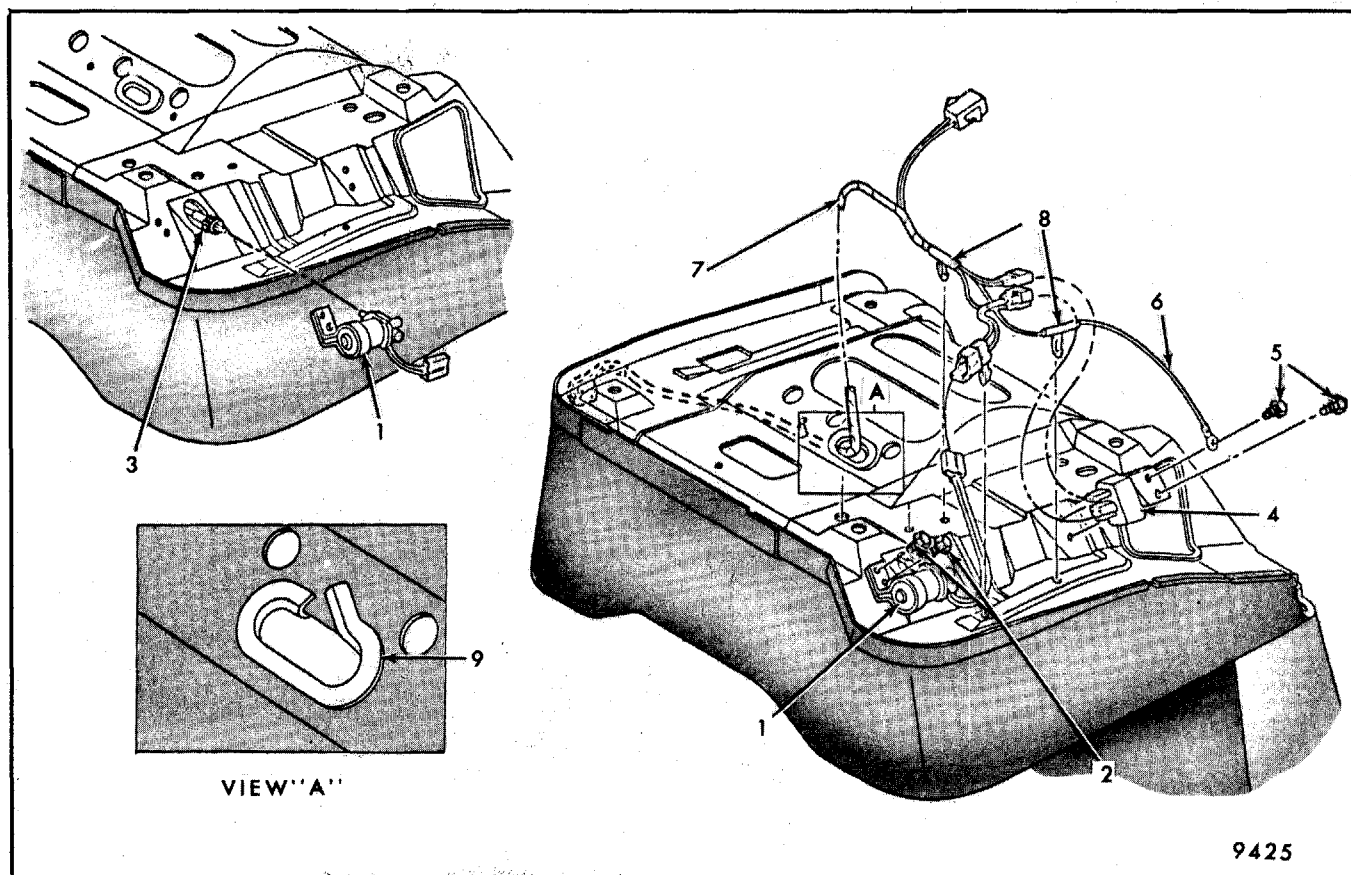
"B and C" Body Power Operated Reclining Seat Back Motor, Drive Cable, Relay and Wire Harness - 45-55 Seats
